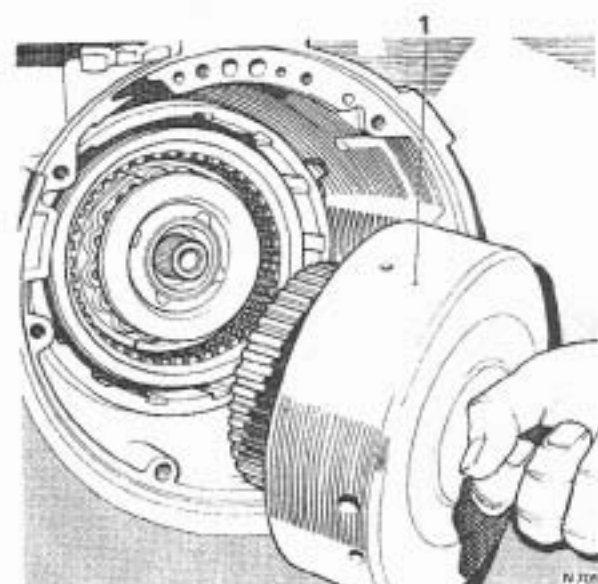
REMOVING THE FORWARD CLUTCH ASSEMBLY
